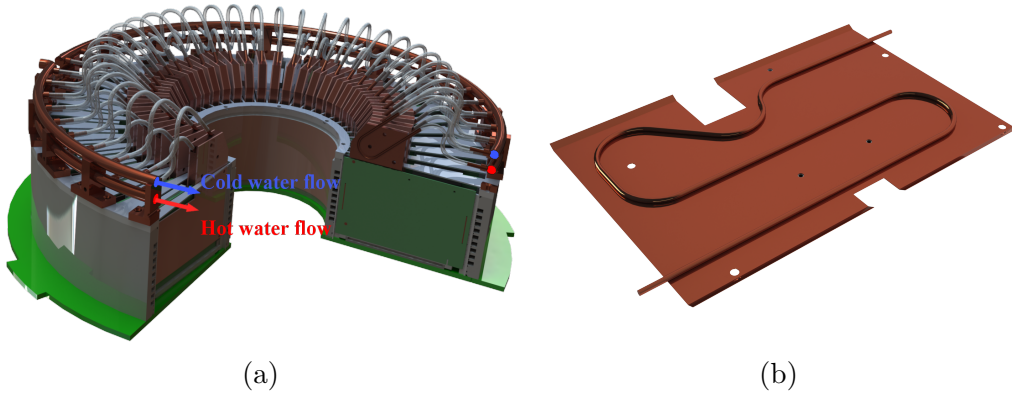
Panel a): CAD rendering of the complete cooling setup. For a better visibility a quarter of the setup has been cut away. Panel (b) shows a CAD rendering of the ADC cooling sheet metal.
